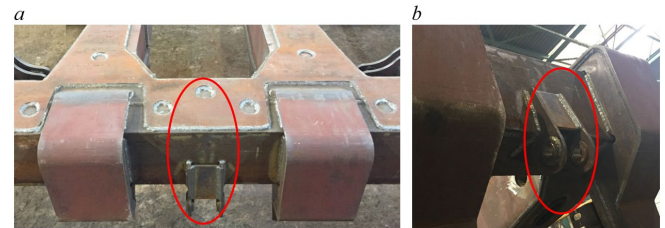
Side longitudinal beam of the frame with welded reinforcing linings (gussets) and supports for hydraulic oscillation damper: *a* – top view; *b* – bottom view.
